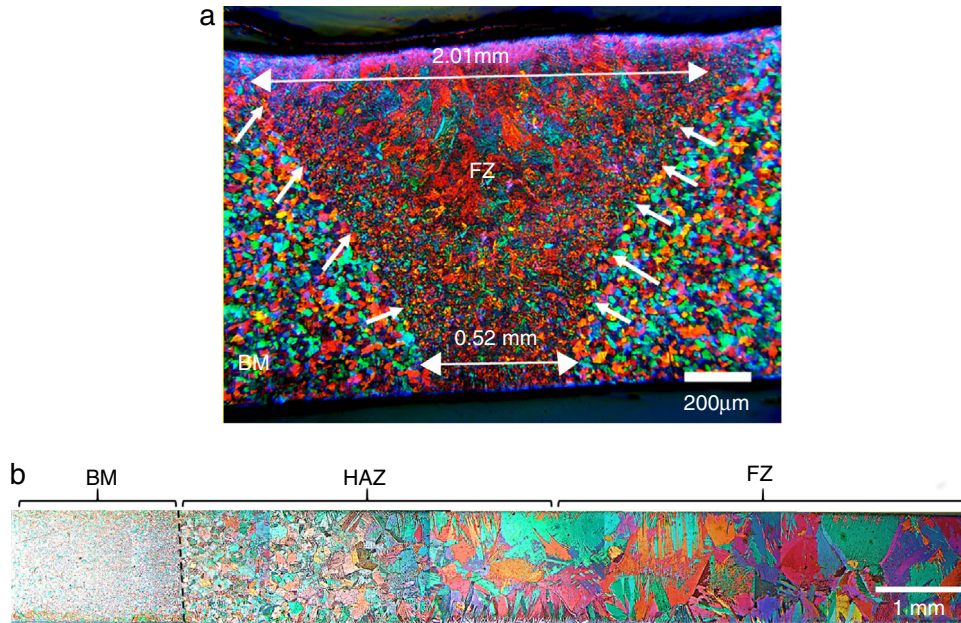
Cross-section of weld pool for (a) laser and (b) TIG weldment.
